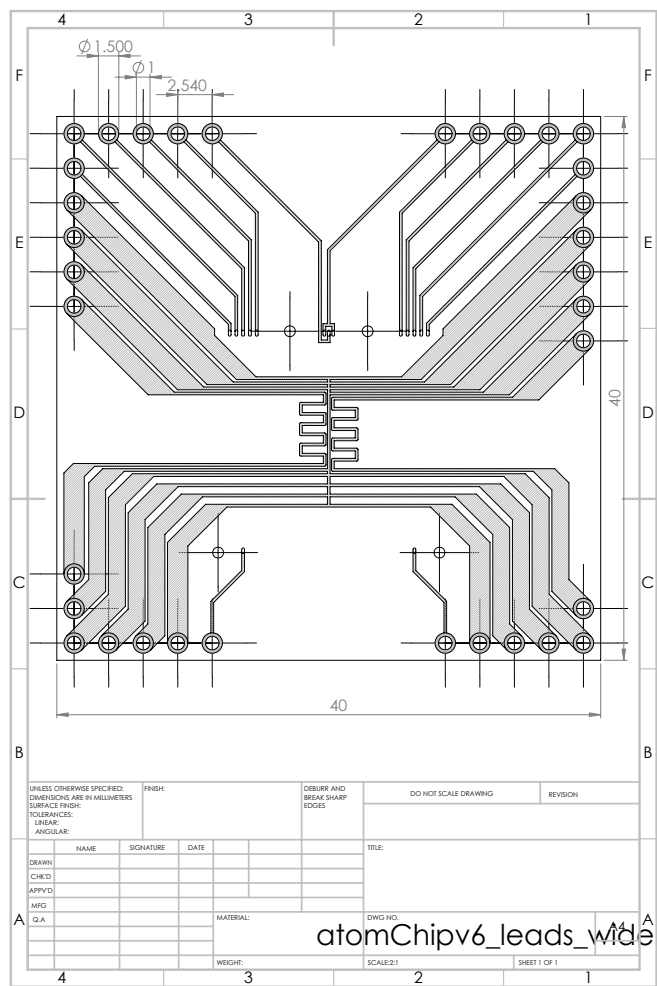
The layout of the wires on the PCB used as the atom chip. Shaded regions indicate wires, with darker shading indicating exposed copper. All dimensions are in mm.
